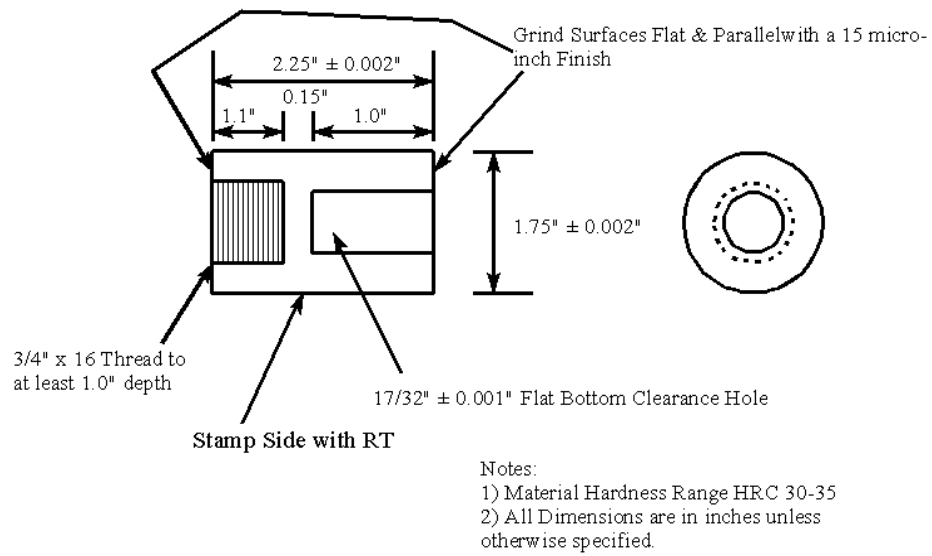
Schematic showing the general dimensional design requirements of the upper self centering head fabricated for the shear punch test fixture.
